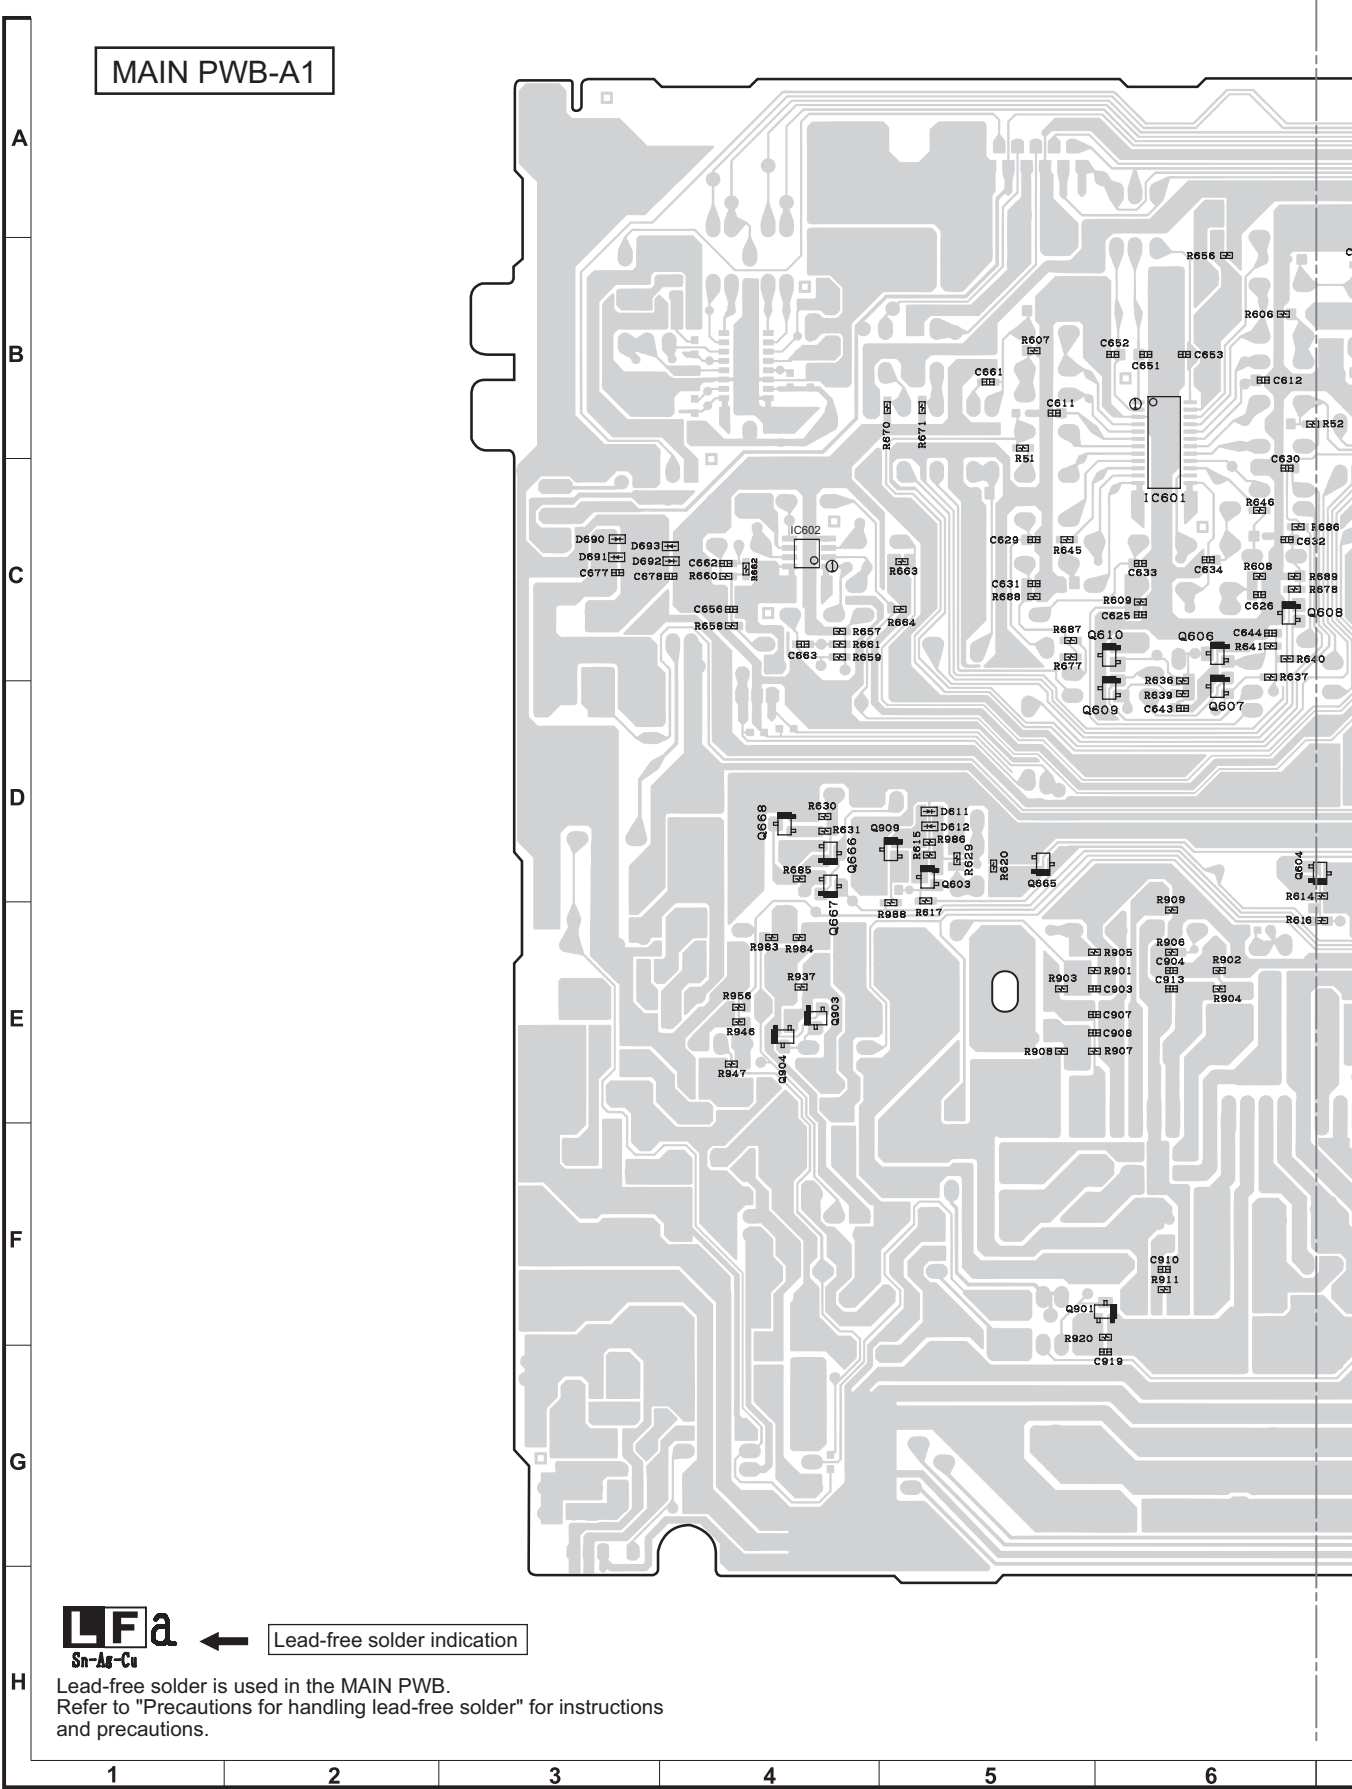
WIRING SIDE OF MAIN PWB (BOTTOM VIEW) (1/2)
